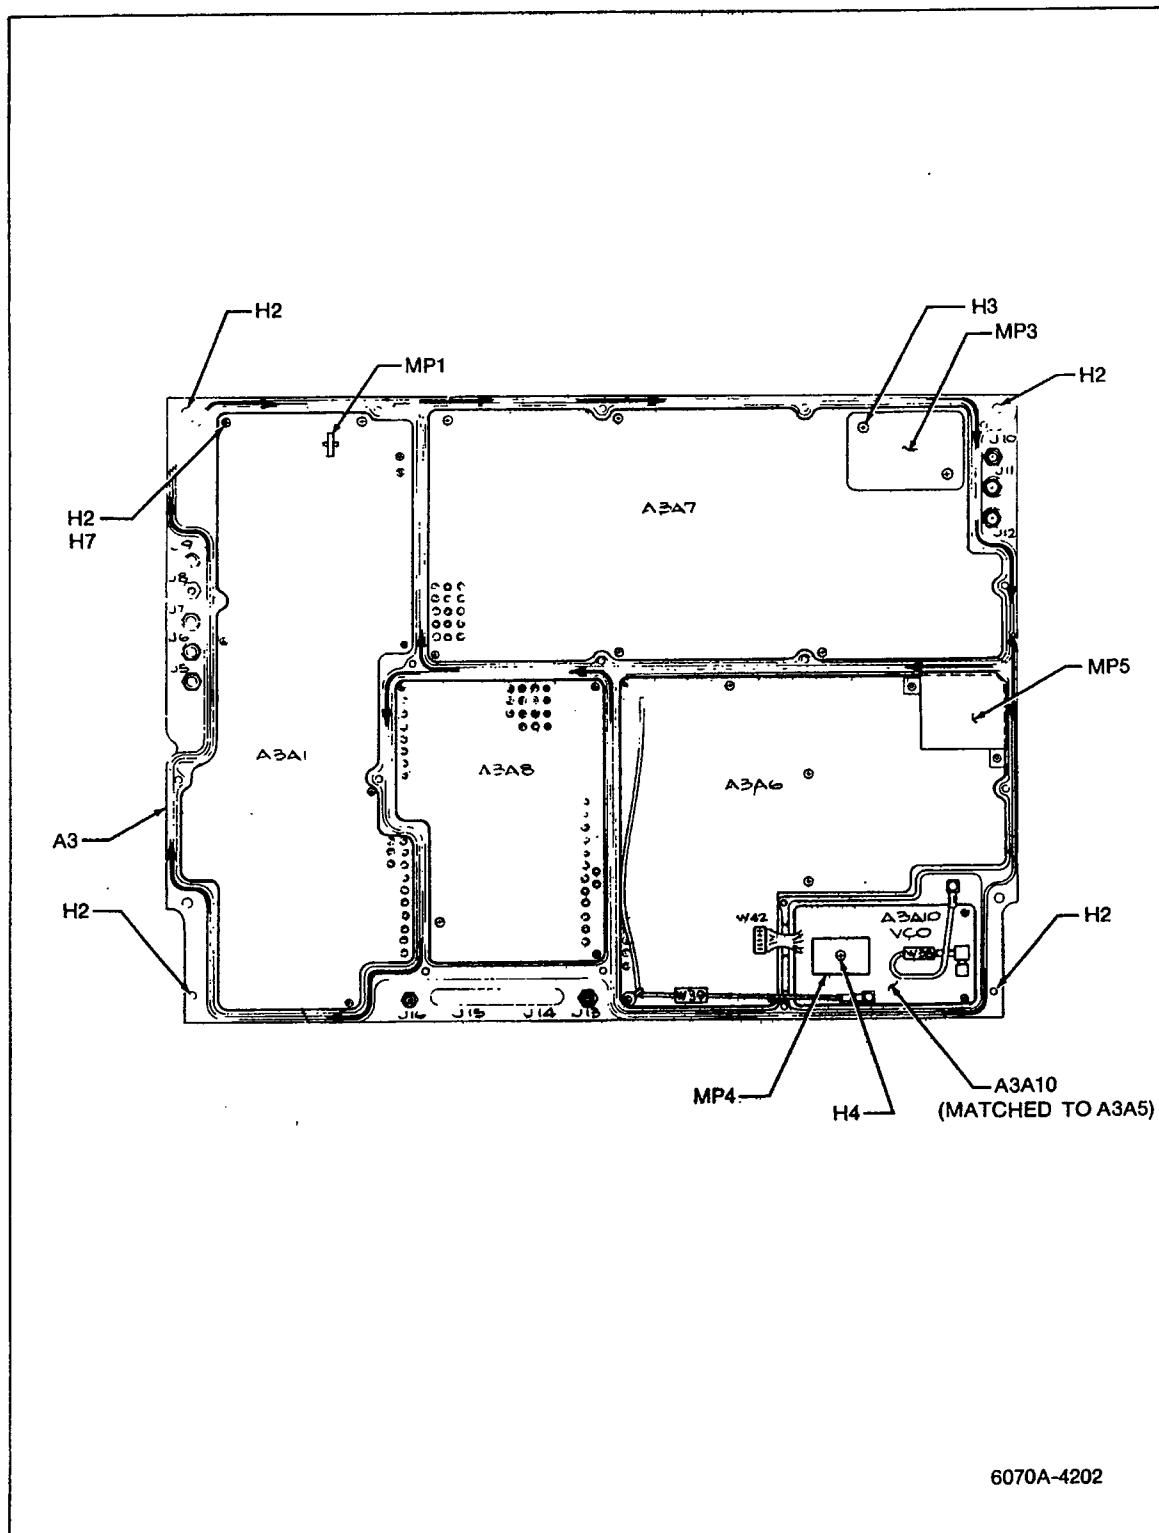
A3 Synthesizer Module Assembly (cont)
